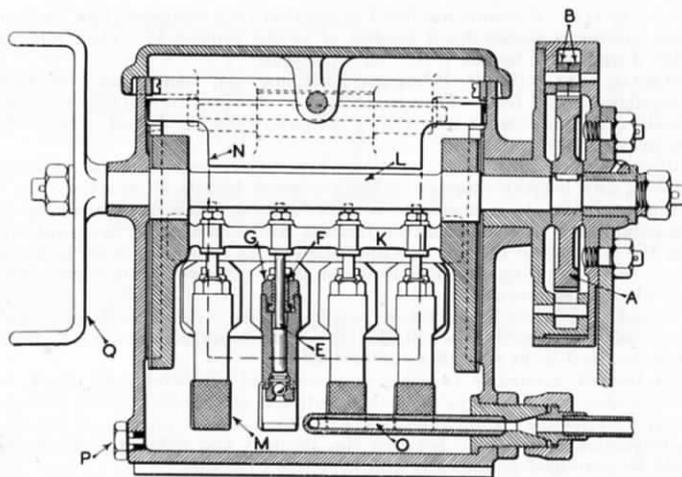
SILVERTOWN MECHANICAL LUBRICATOR IN SECTIONAL ELEVATION.
